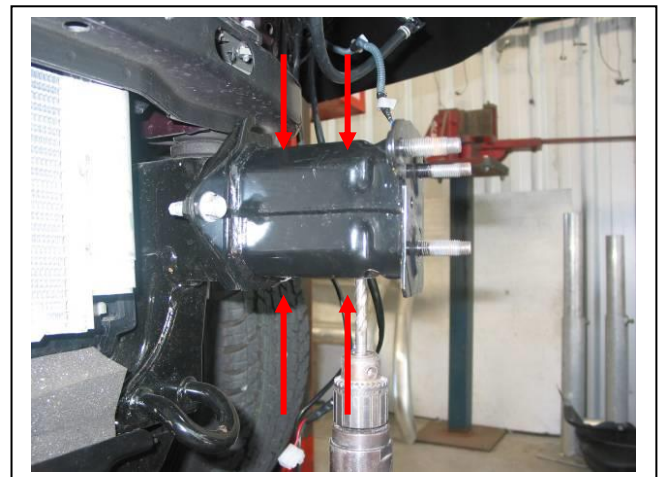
Drill holes to 10mm (3/8). Drill or die
